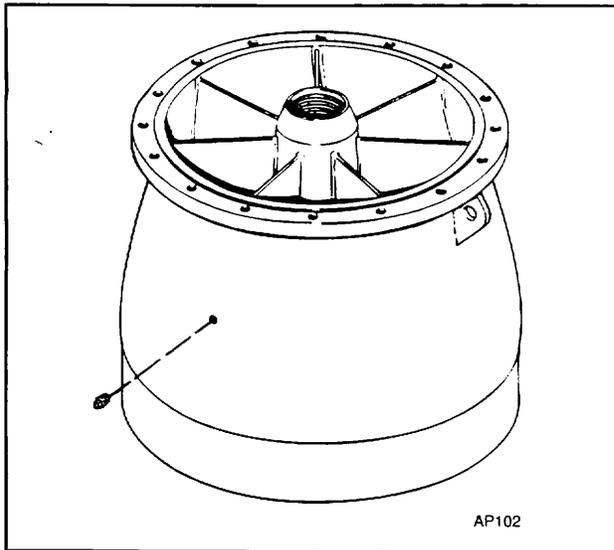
A. Propeller Bowl Assembly - Mixed Flow Pump
